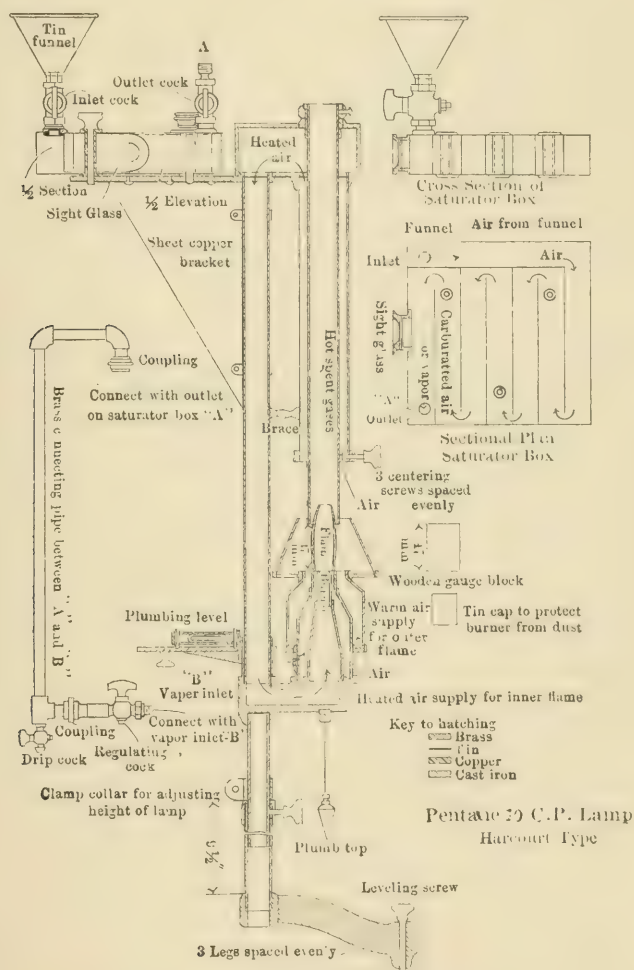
SECTIONAL VIEW OF PENTANE LAMP.
